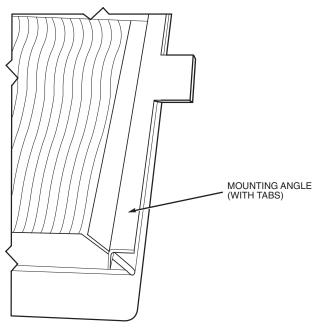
Mounting Angle (With Tabs) Attached to Filter Track Assembly
